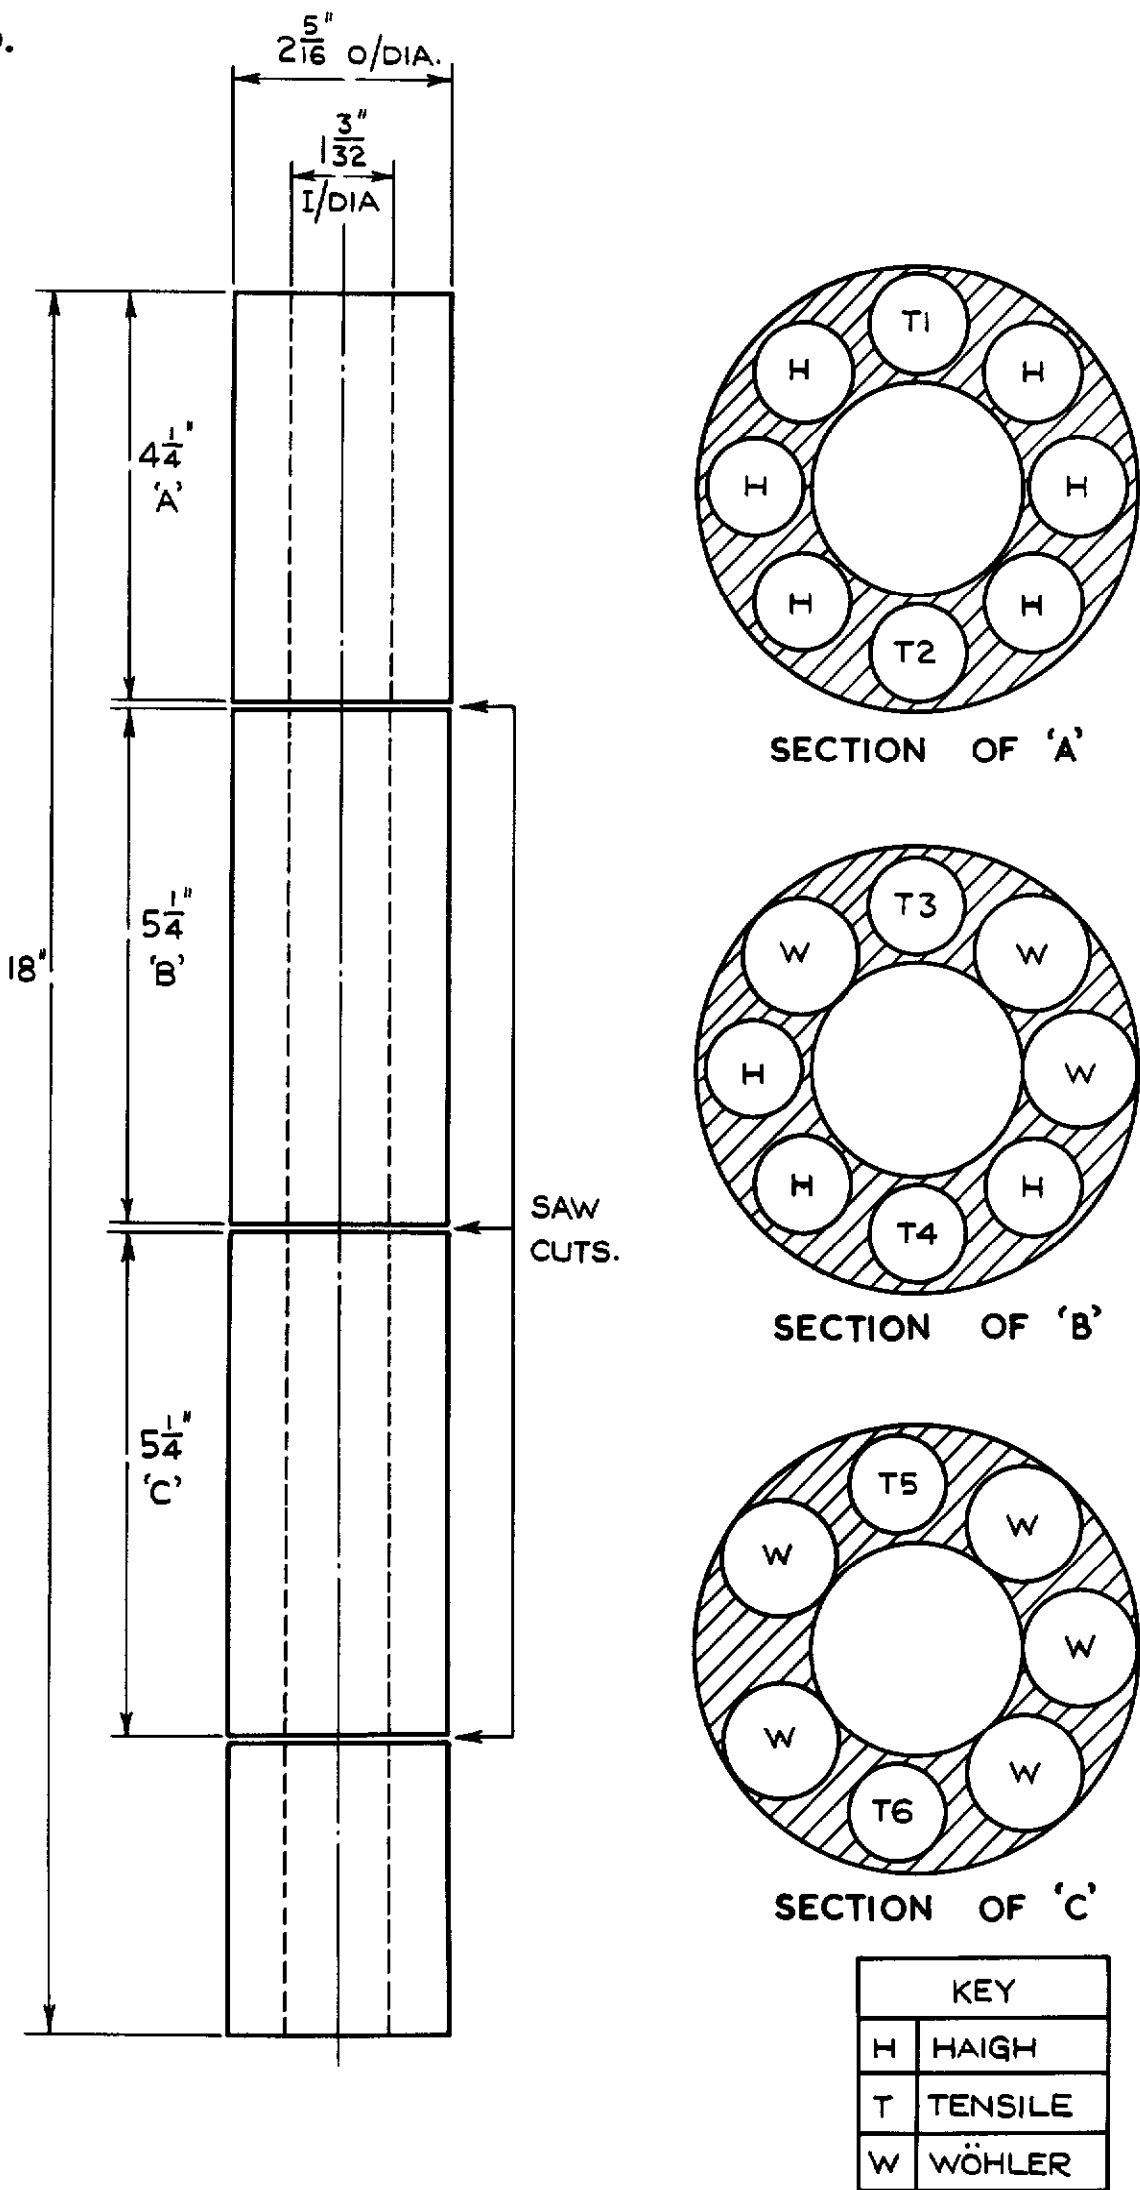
LOCATION OF TEST PIECES IN EACH TUBE.
